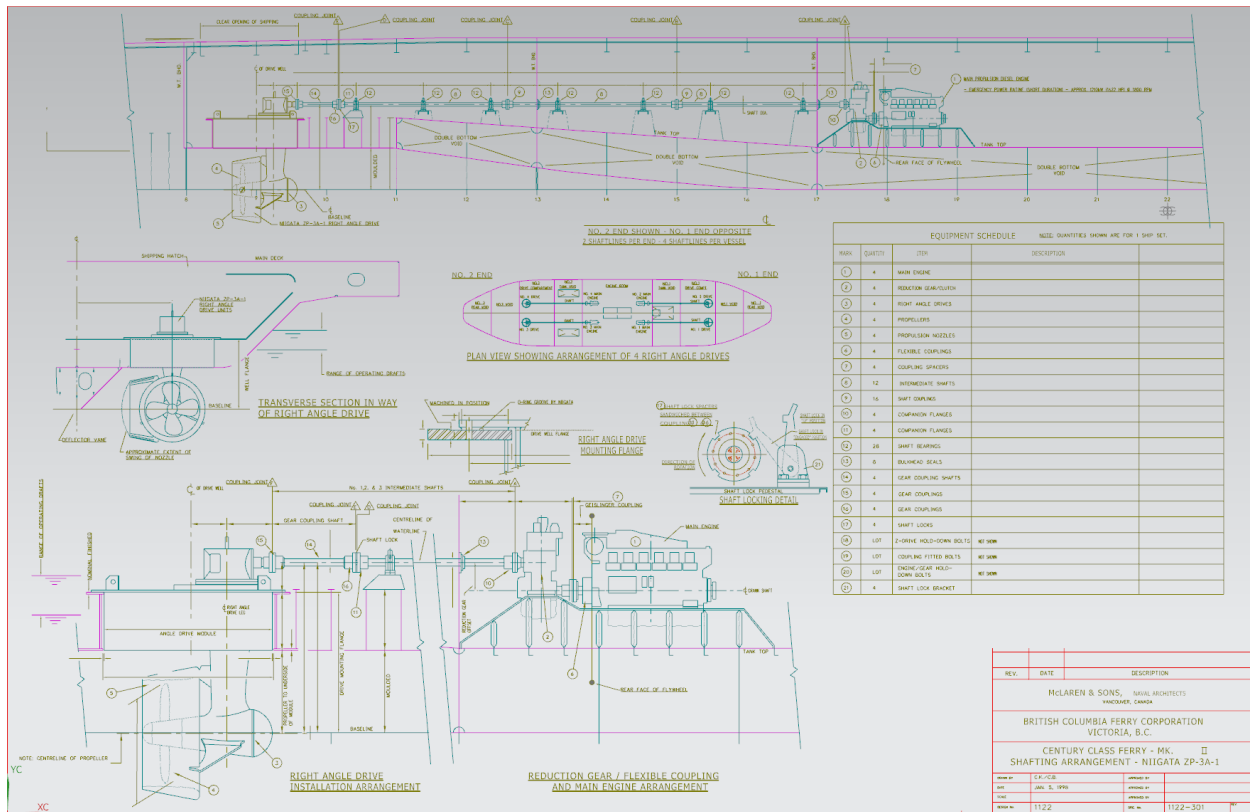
M.V. *Skeena Queen* Shaft Arrangement Drawing (Dimensions Redacted)
